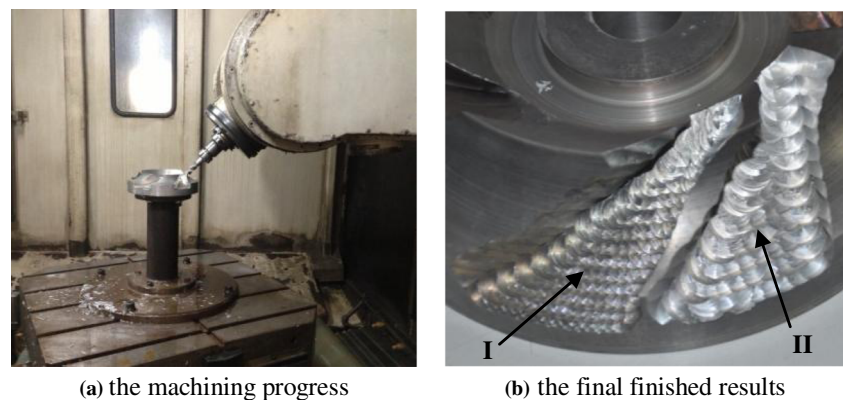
shows the actual machining in progress and its final shape after machining. In Fig. 11, the surface I is the final shape milled by the experience cutter, and the surface II is the final shape milled by the largest cutter. It can be seen from Fig. 11b that the actual machining tool path of the largest cutter (the finished surface II) is less than that of the experience cutter (the finished surface I) and the finished surfaces I and II of the impeller channel without pits and high residual metals. That is consistent with the simulation and calculation results (see Figs. 9 and 10). The actual machining time of the largest cutter is reduced by 28 min compared to the experience cutter, and the actual efficiency is increased by 40 %.
